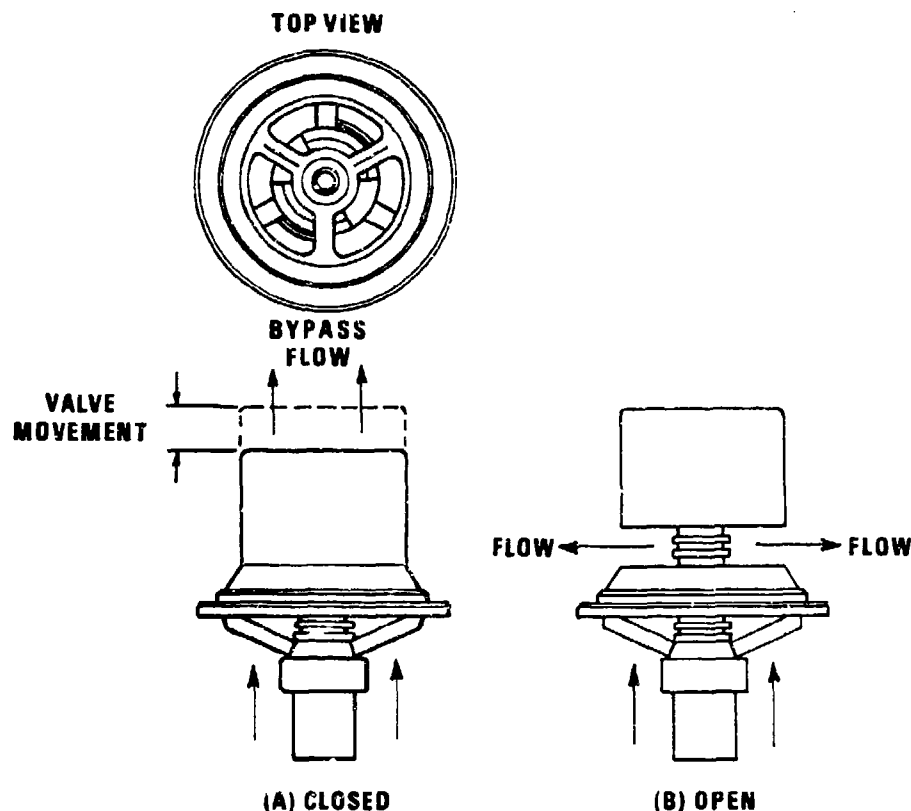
Pellet Type Thermostat With Sleeve Valve (Top Bypass)
